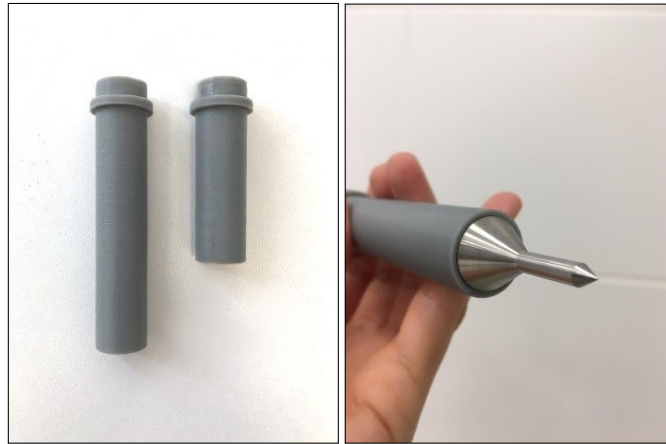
Some Measurement Tip Holder Parts of Pointer Tool.
